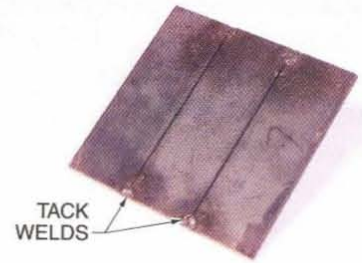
Tack welding must comply with the welding procedure specification if it is incorporated into the final weld.
